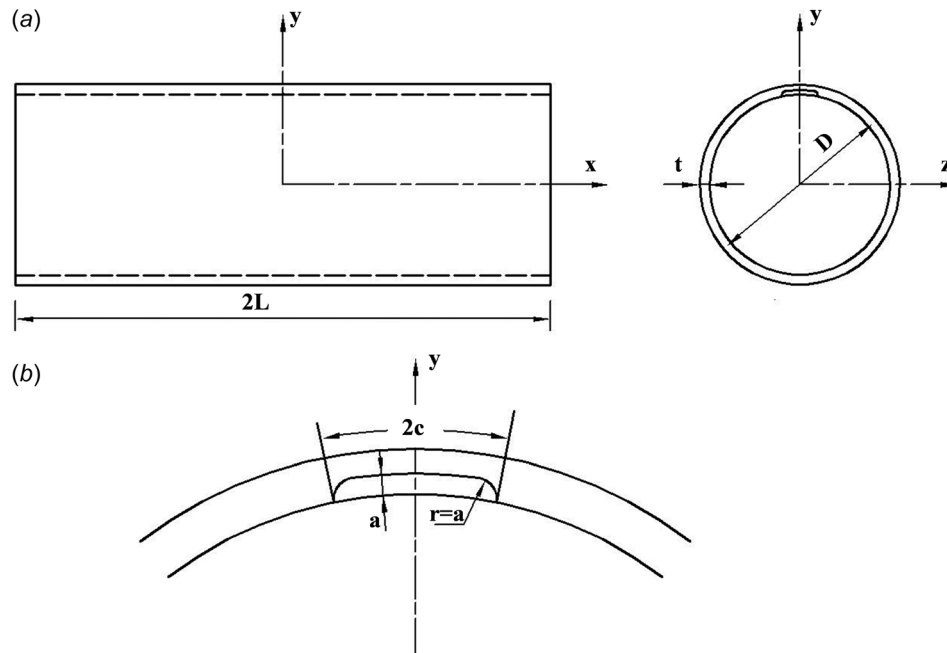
(a) The geometrical dimension of the pipe with a circumferential surface crack and (b) geometry of the constant depth surface crack
